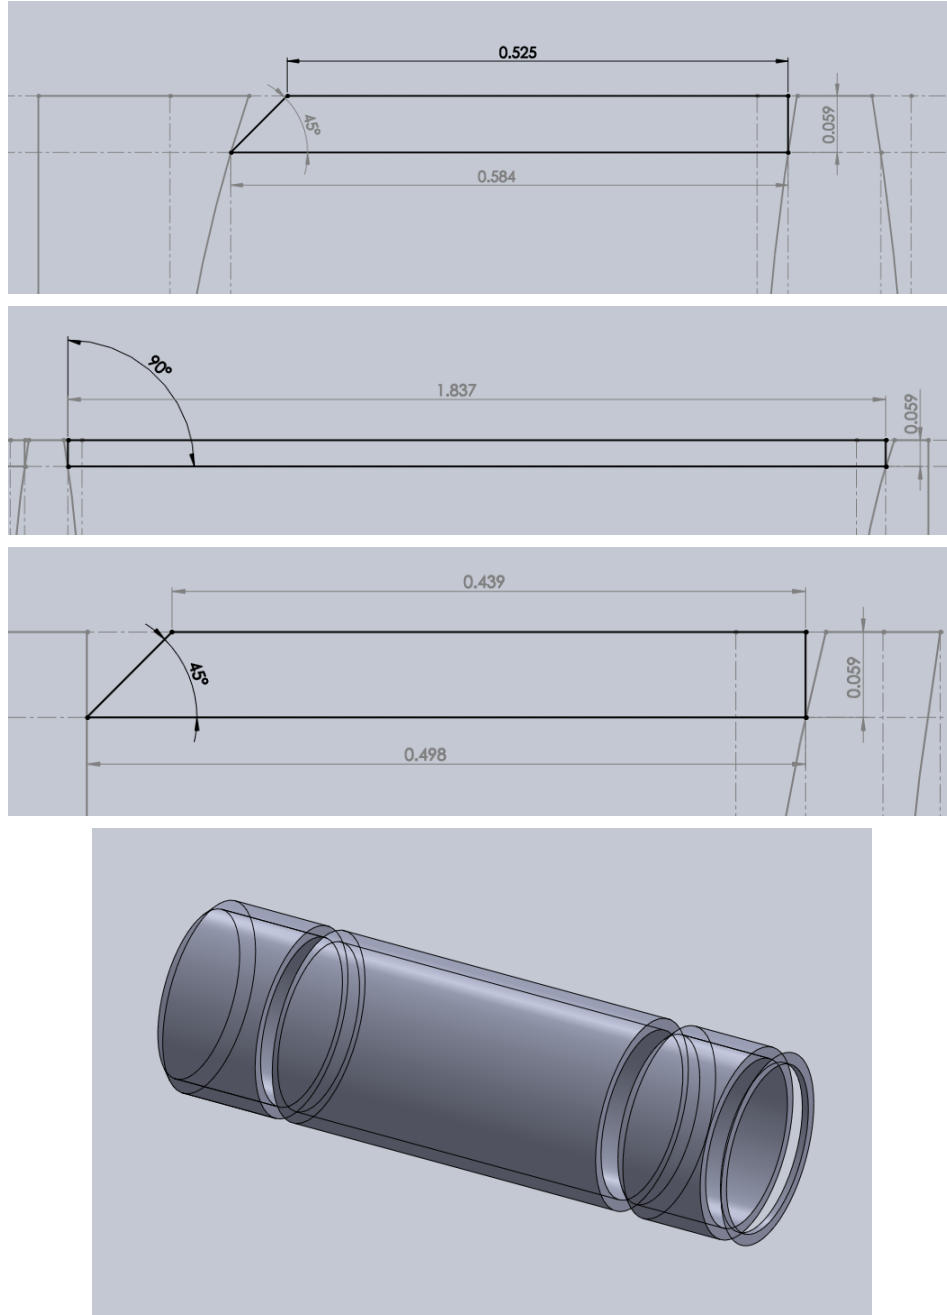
CAD drawings of lens-stack ring spacers. We adapt the original design from [101], and machine them out of brass. Each figure shows the cross section of the annular piece. The annotated dimensions are in millimeters. We use a conventional threaded ring at the end to hold the meniscus in place.
